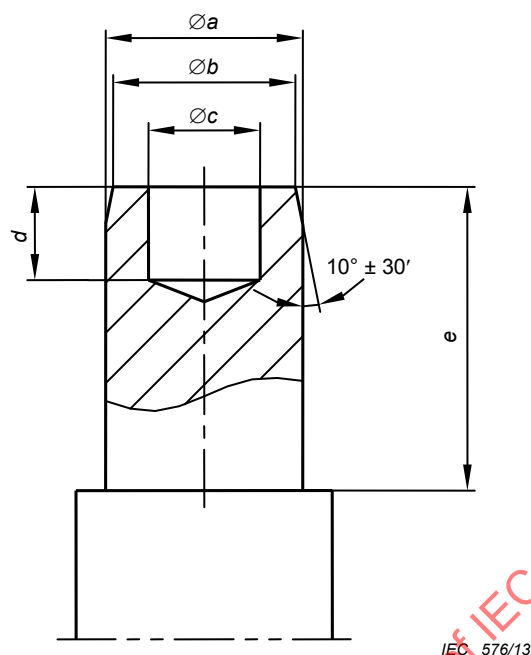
Gauge for outer contact of connector with pin-centre contact
